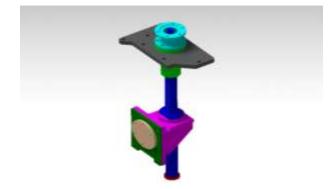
Assembly of Ball Screw along with Mounting Bracket and Bearing Housing
